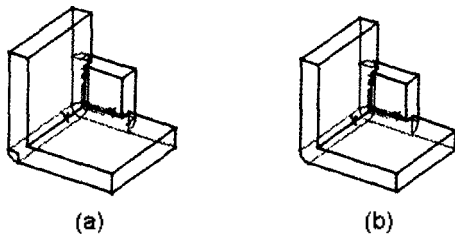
Automatic hole removal on thickness faces (a) three holes on the thickness faces (b) after removing holes.
